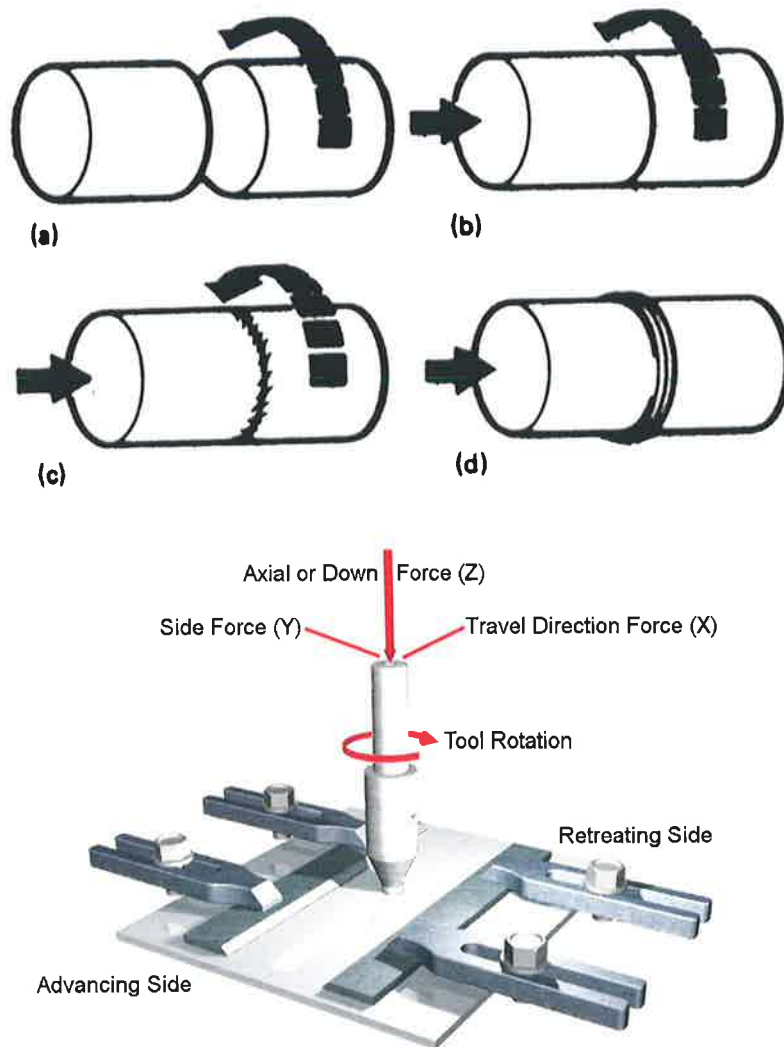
a)-d) basic rotational friction welding: one piece rotates while the other stationary piece is brought into contact with the rotating part. [3]
